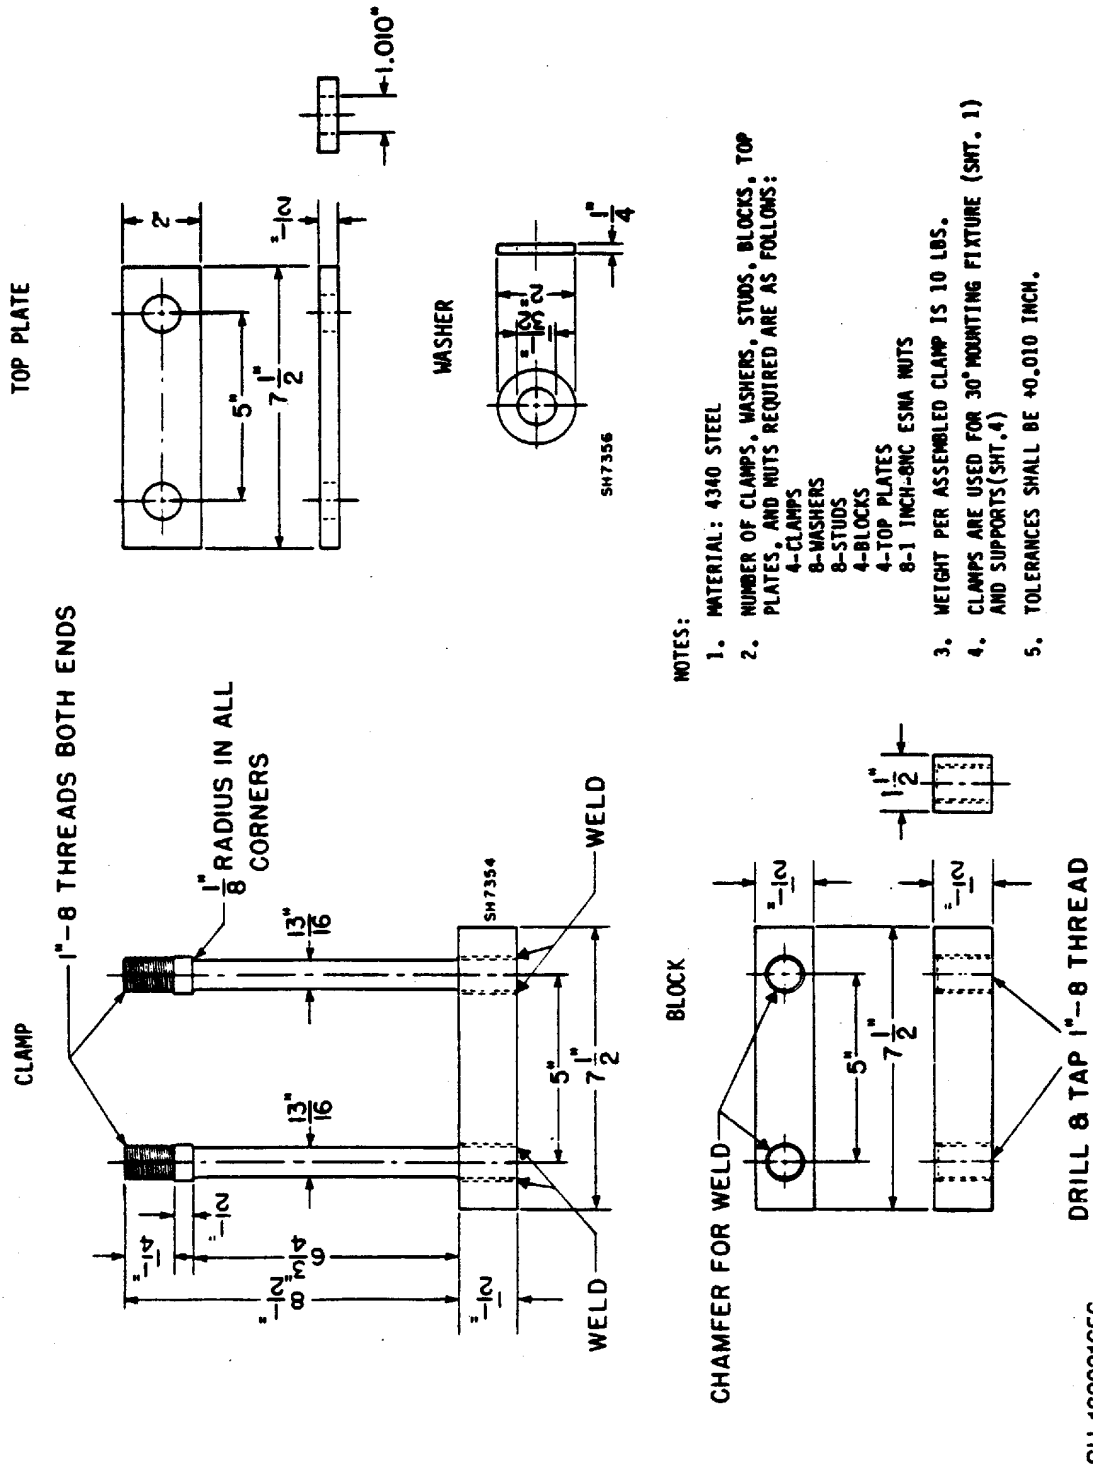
30 degree mounting fixture for testing bulkhead mounted equipment on mediumweight shock testing machine. (Sheet 5 of 5)
